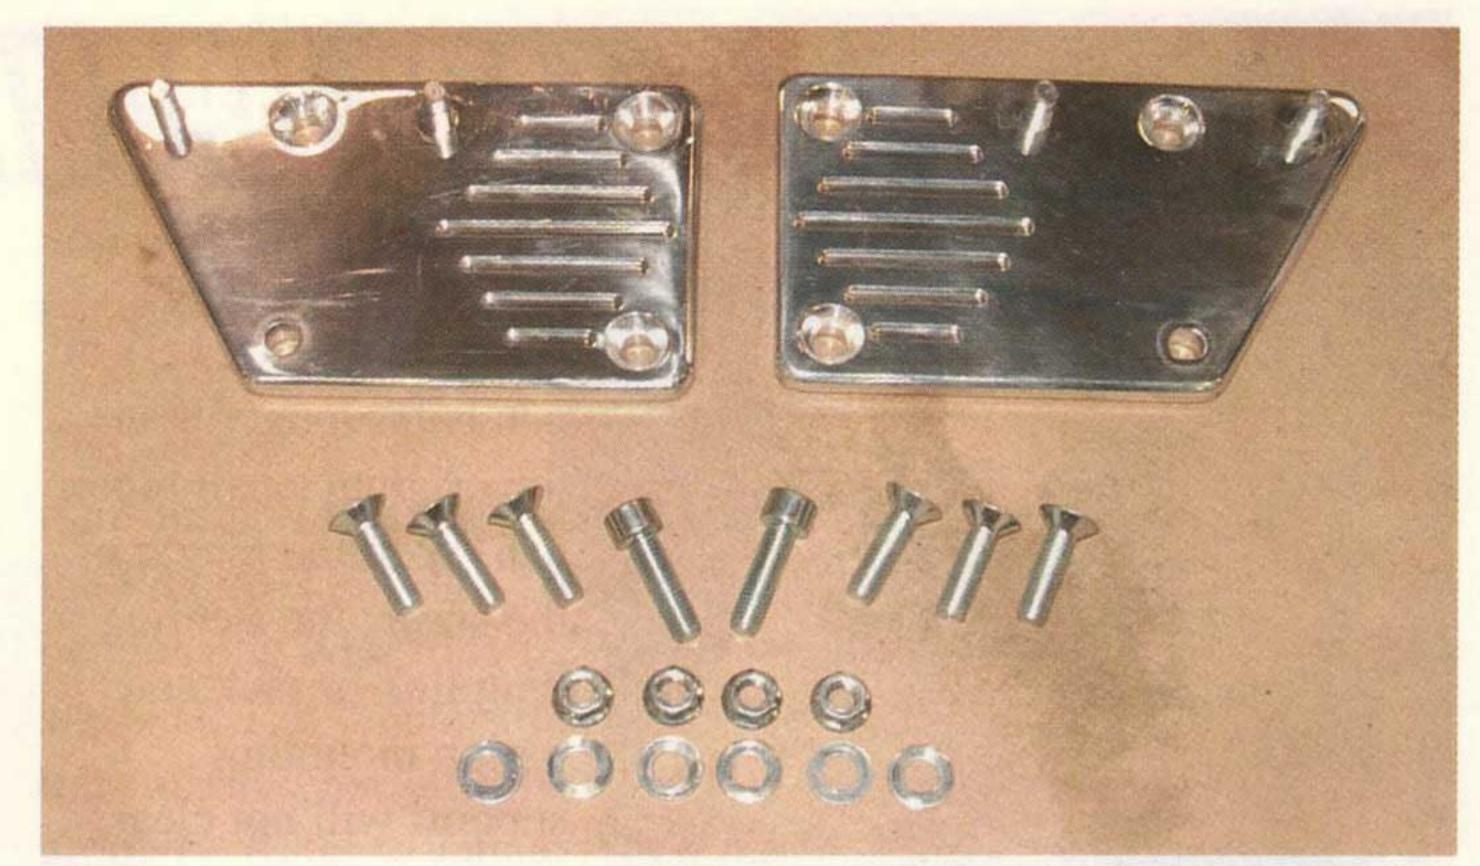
Our aluminum installation plate kit, P/N 18-400 (polished) or P/N 18-401 (unpolished) will bolt to the side of the LS1 engine using the stock four bosses and allow the early side engine mount kit P/N 18-02 to be used.
